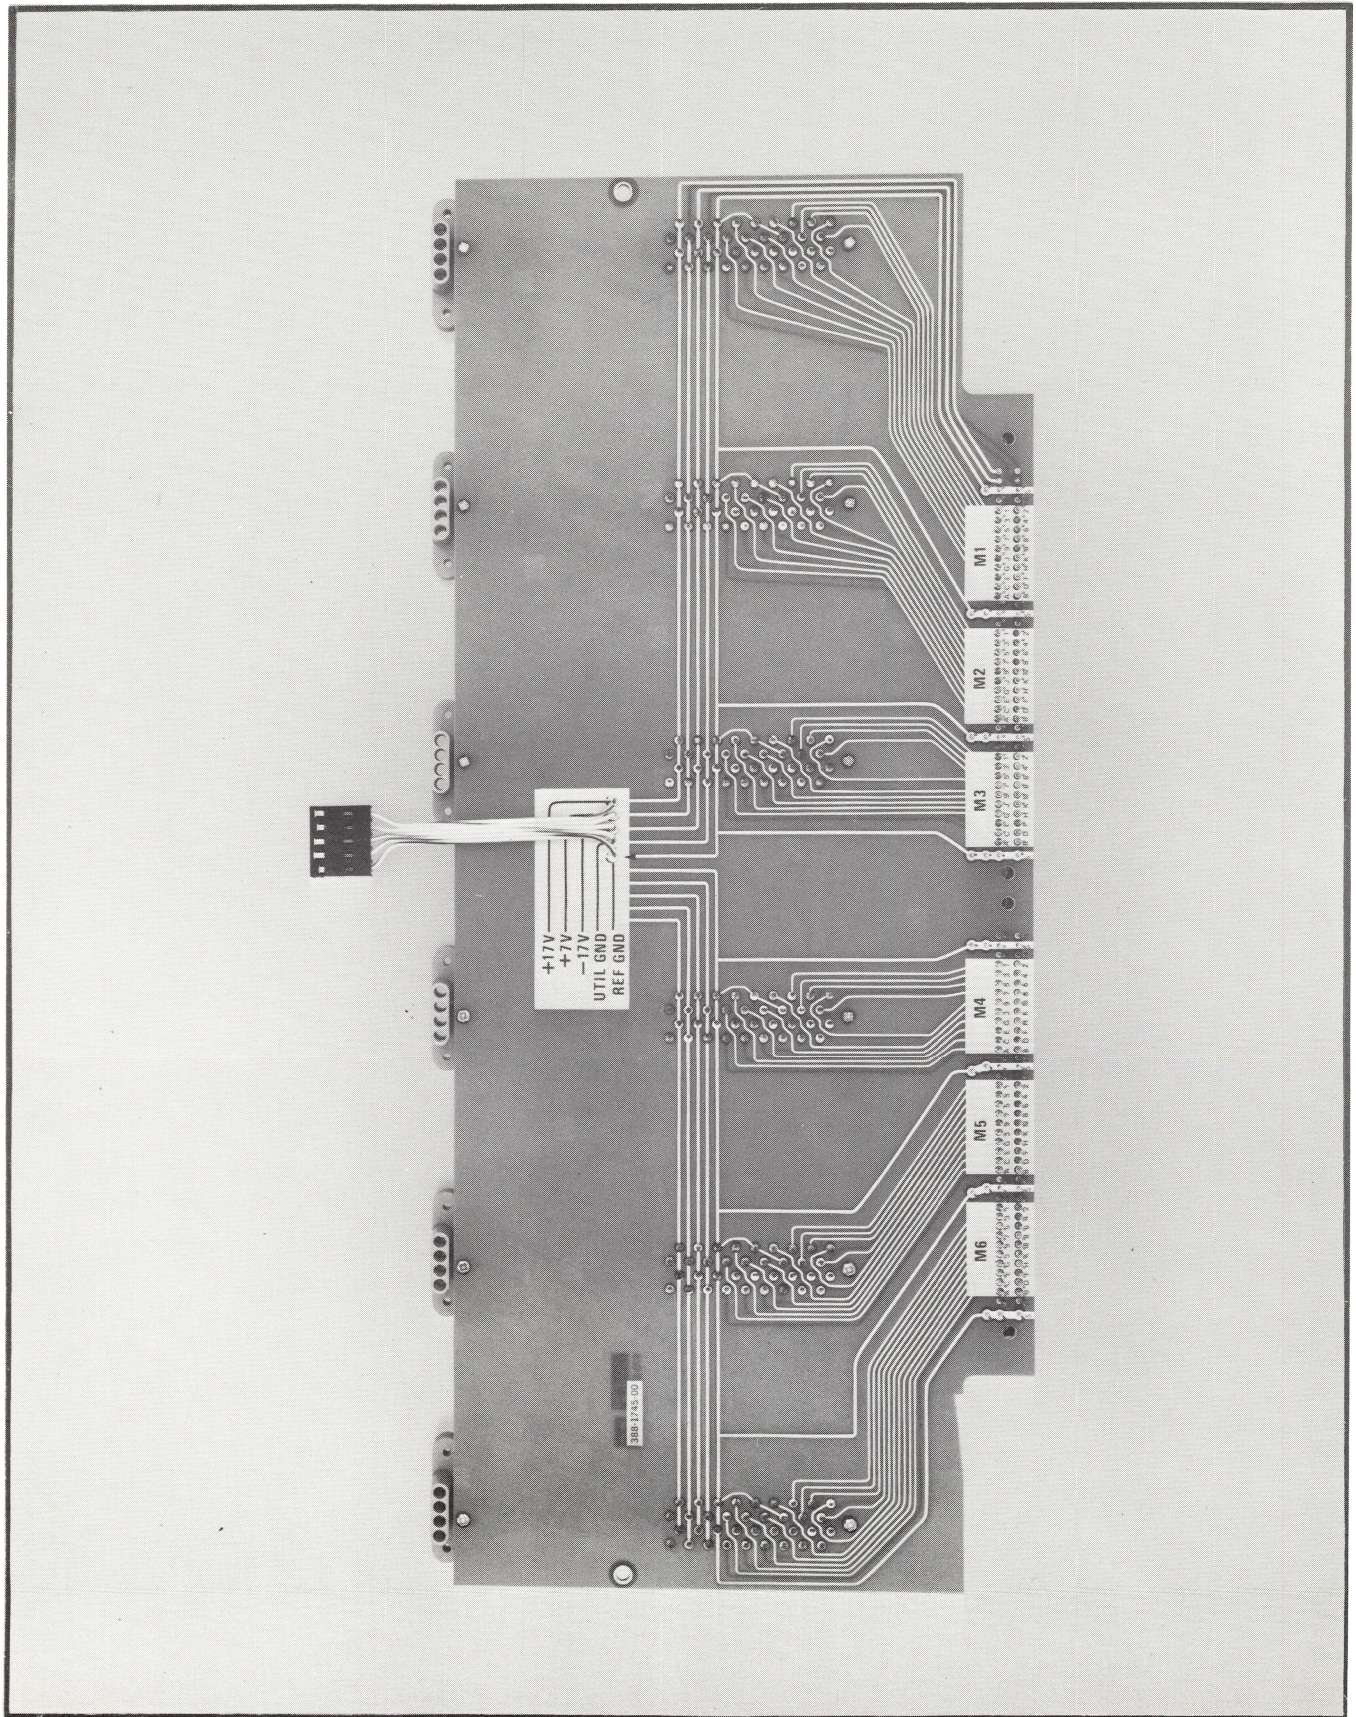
2601 Interface Board showing 80-pin connector pin numbers.
